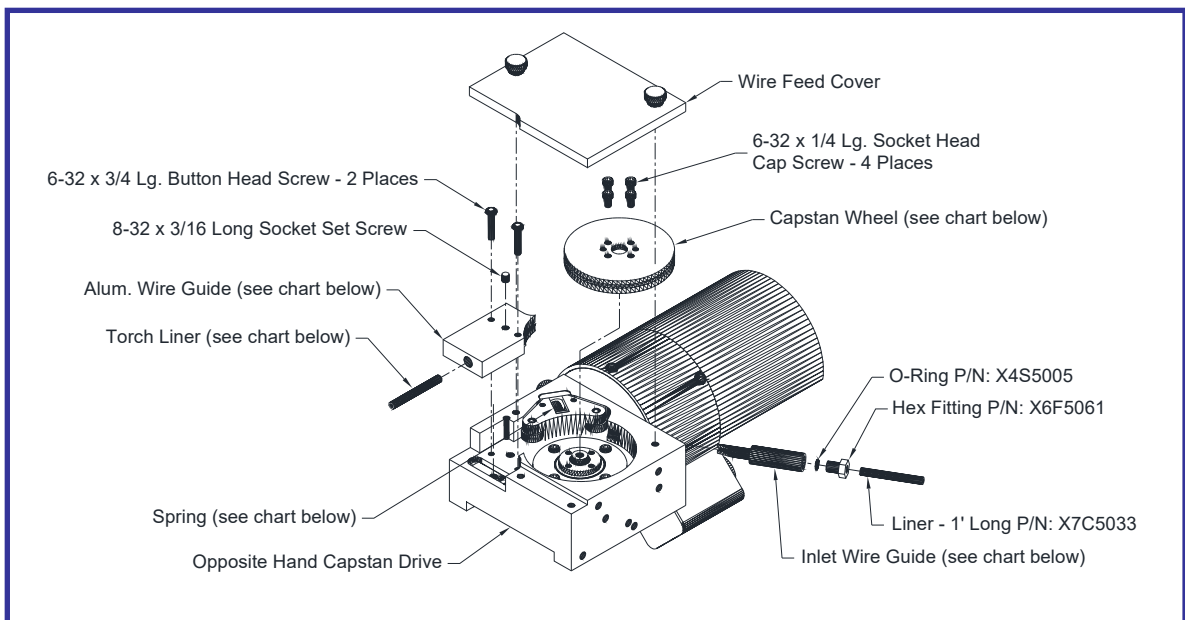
Aluminum Pick-up Block Opposite Hand Wire Drive Configuration
